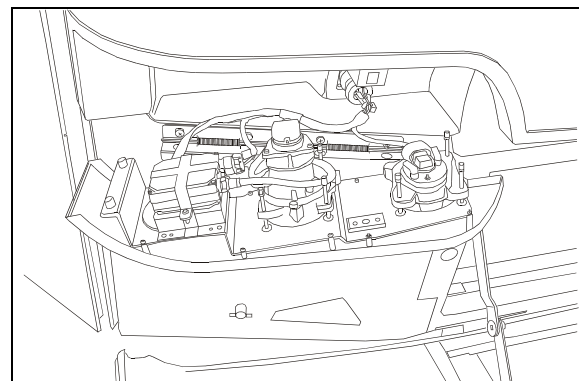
OPENING HEADLIGHT ASSEMBLY
